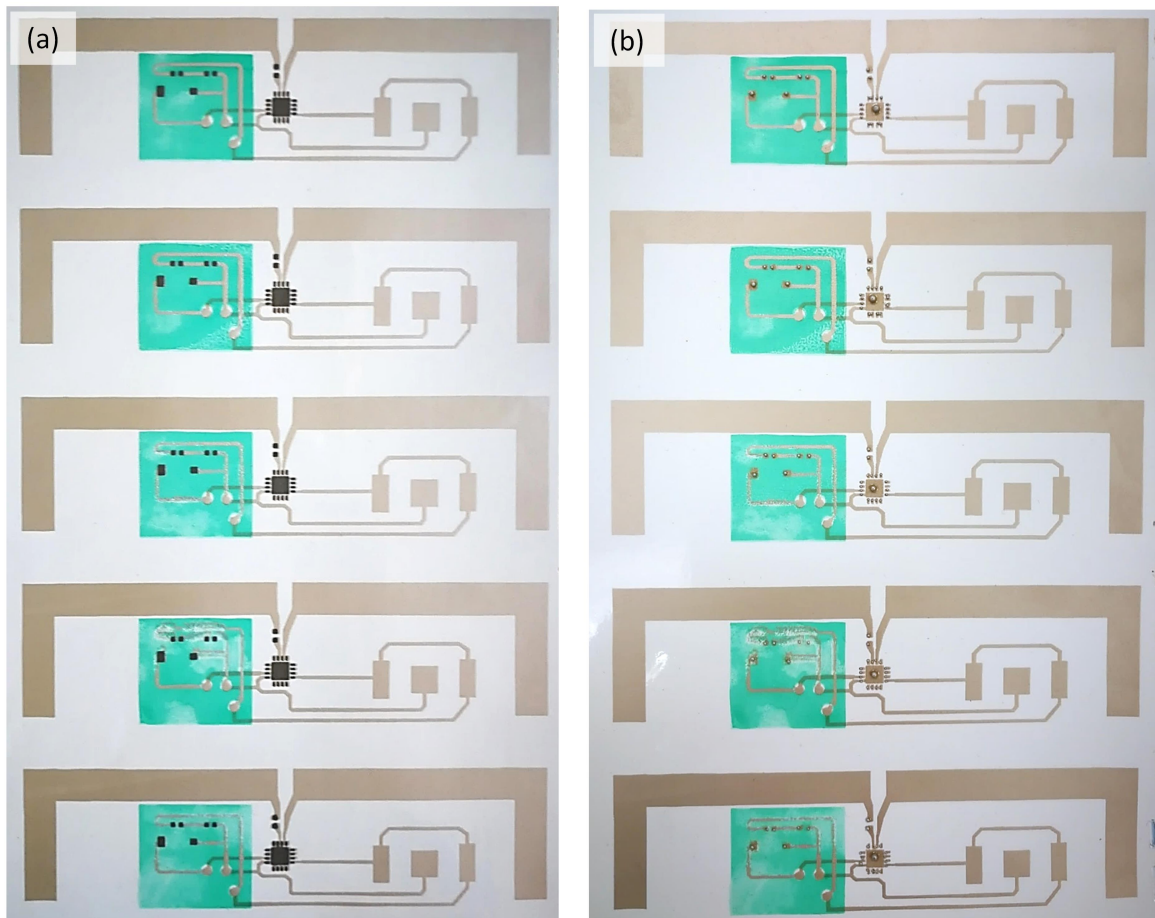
a) Stencil printed low-temperature solder paste on printed tags, and b) solder on printed tags after reflow testing in convection oven.
